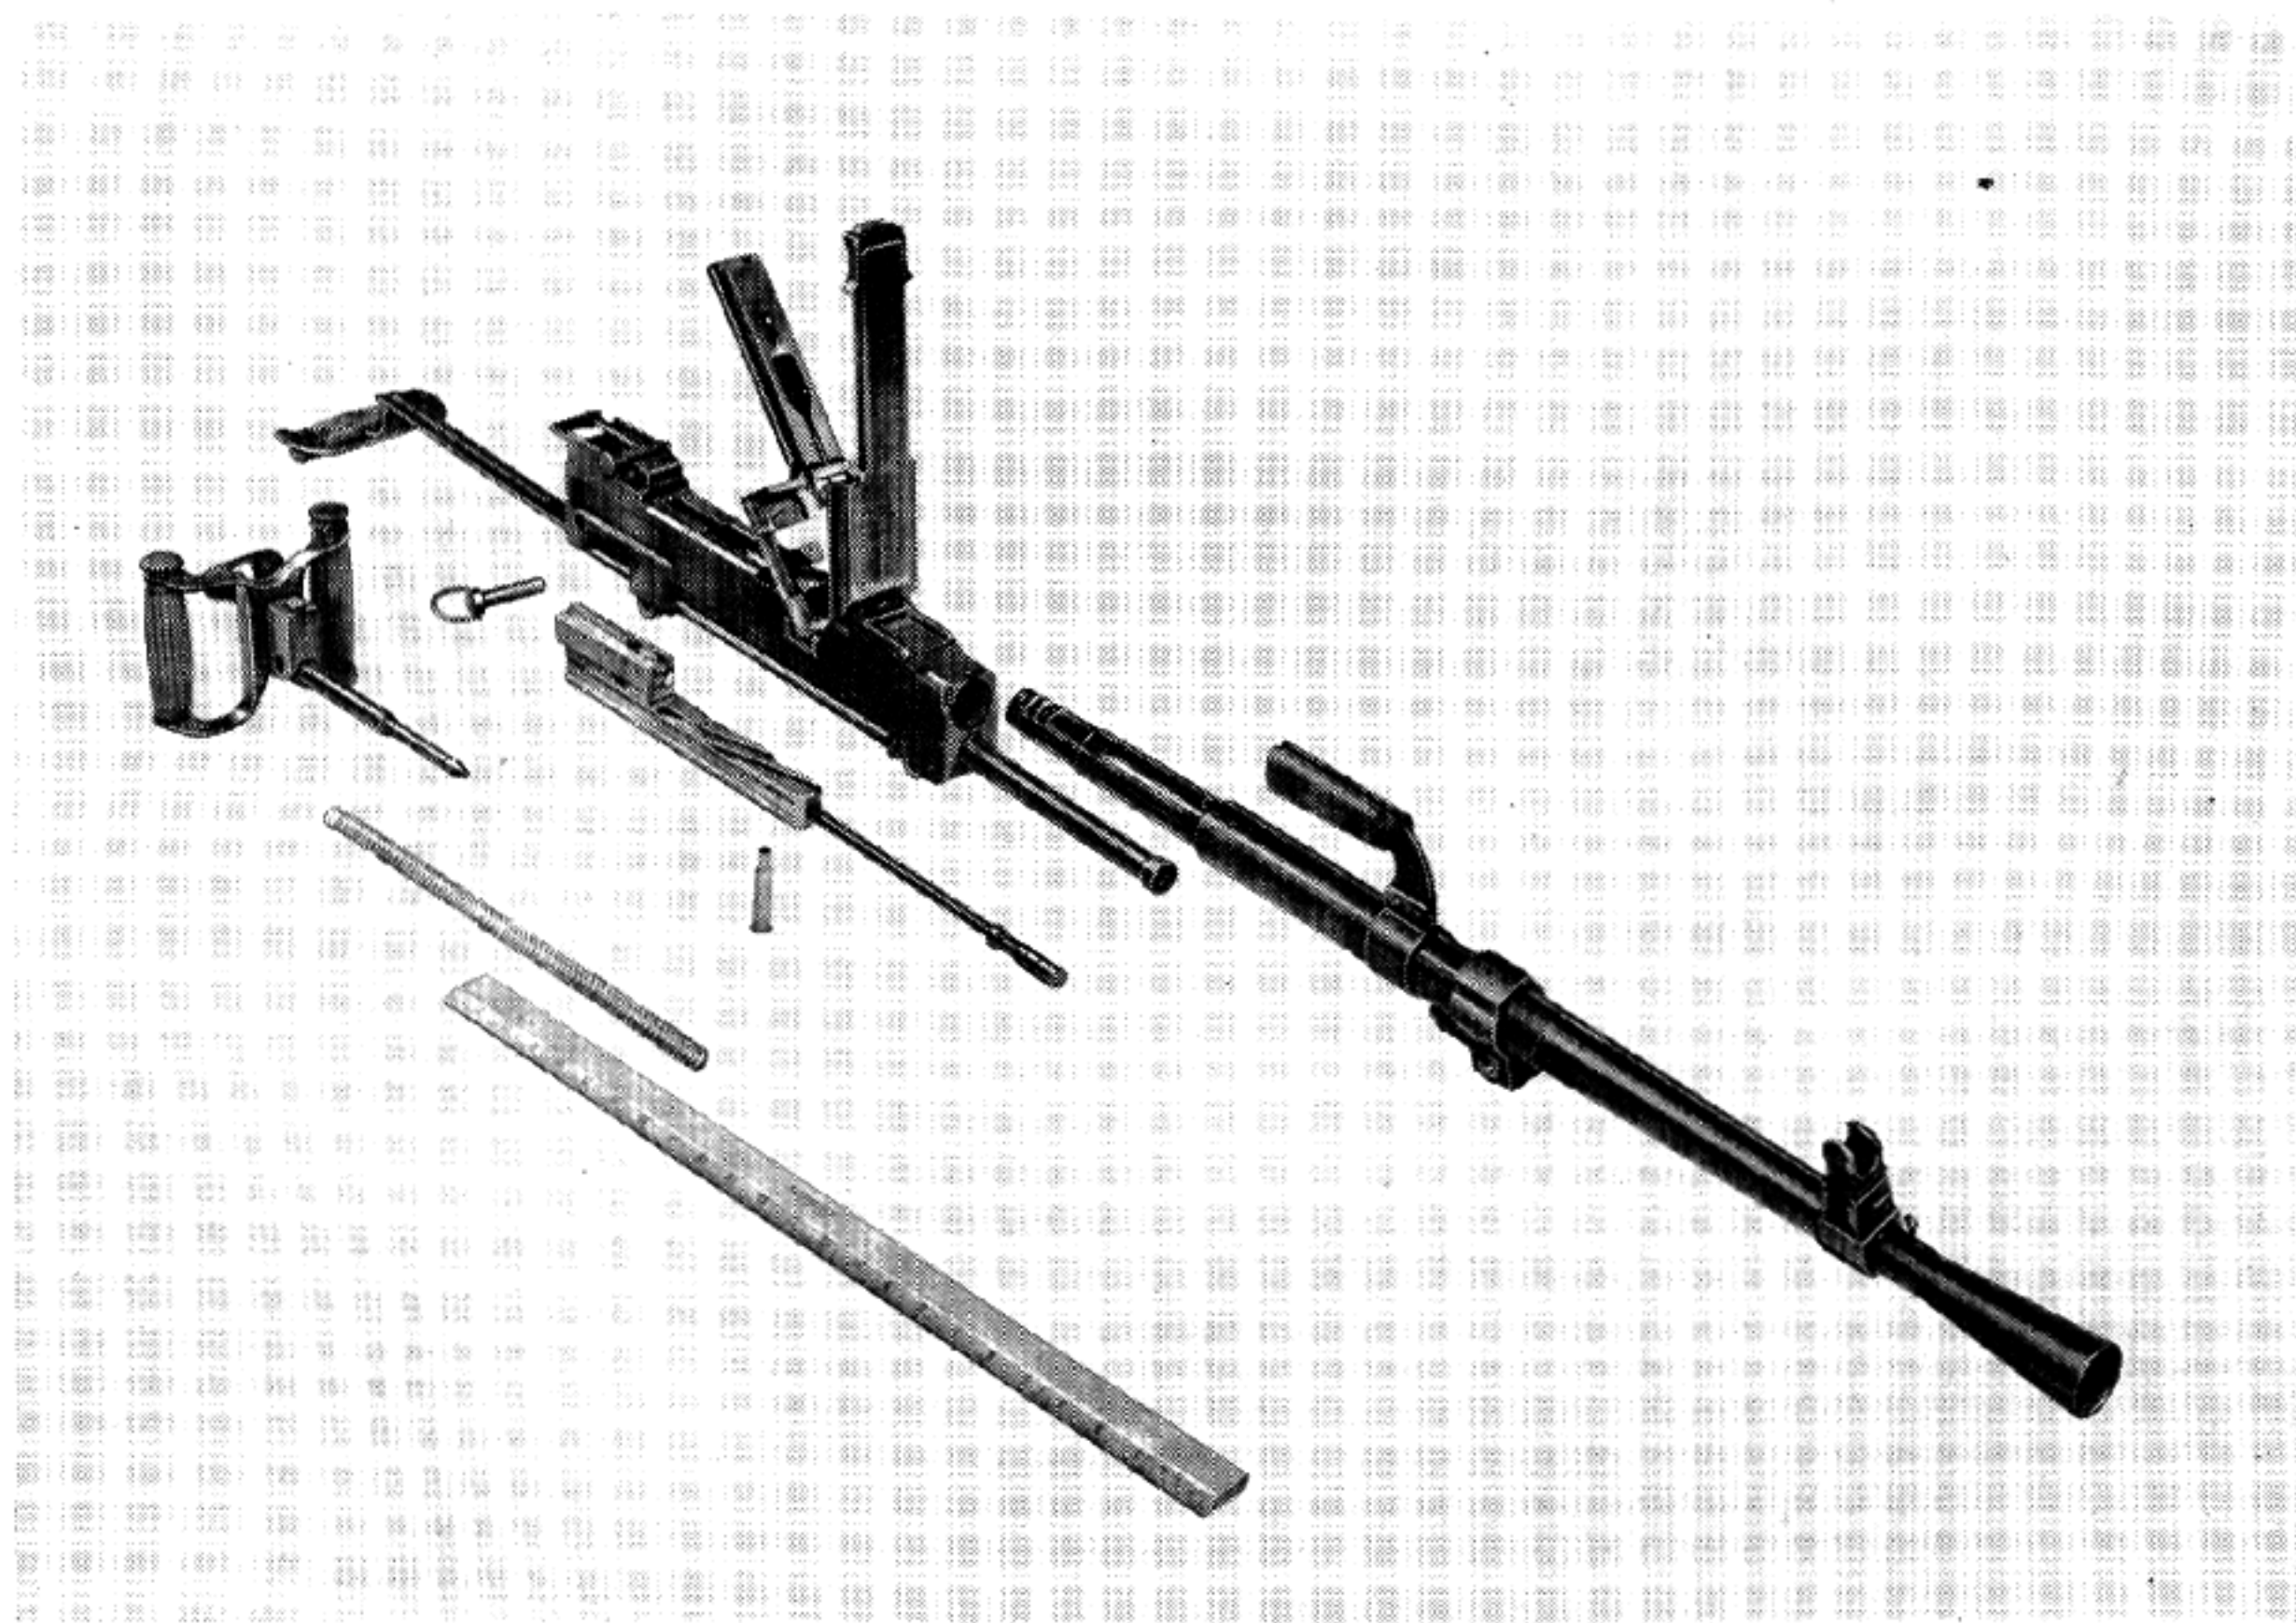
Stripping the SG-43, continued. The bolt and the operating slide, with piston attached, have been removed.
